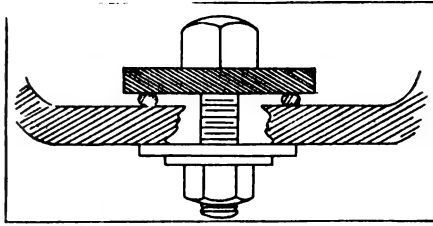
Mending a Hole with Iron Disc, Gasket and Bolt.
